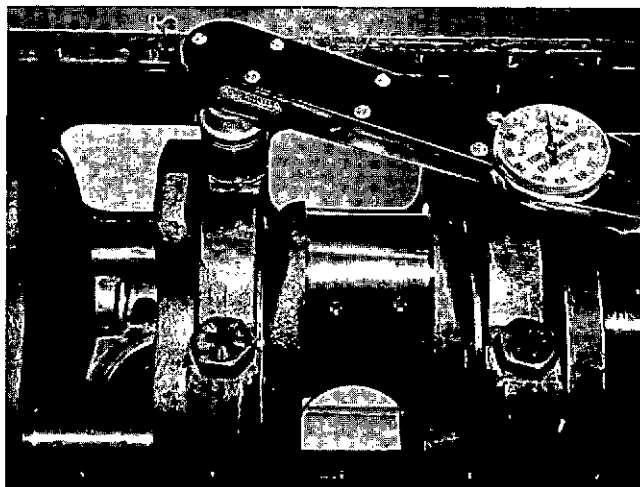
, V414108. Tighten main bearing cap screws
